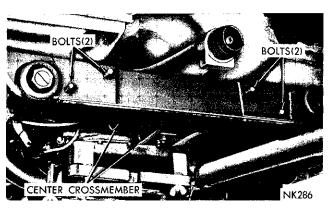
Removing or Installing Center— Crossmember (Chrysler Models)
